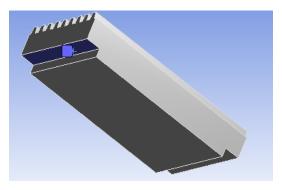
SHOWING JAW CRUSHER FIXED SUPPORT
